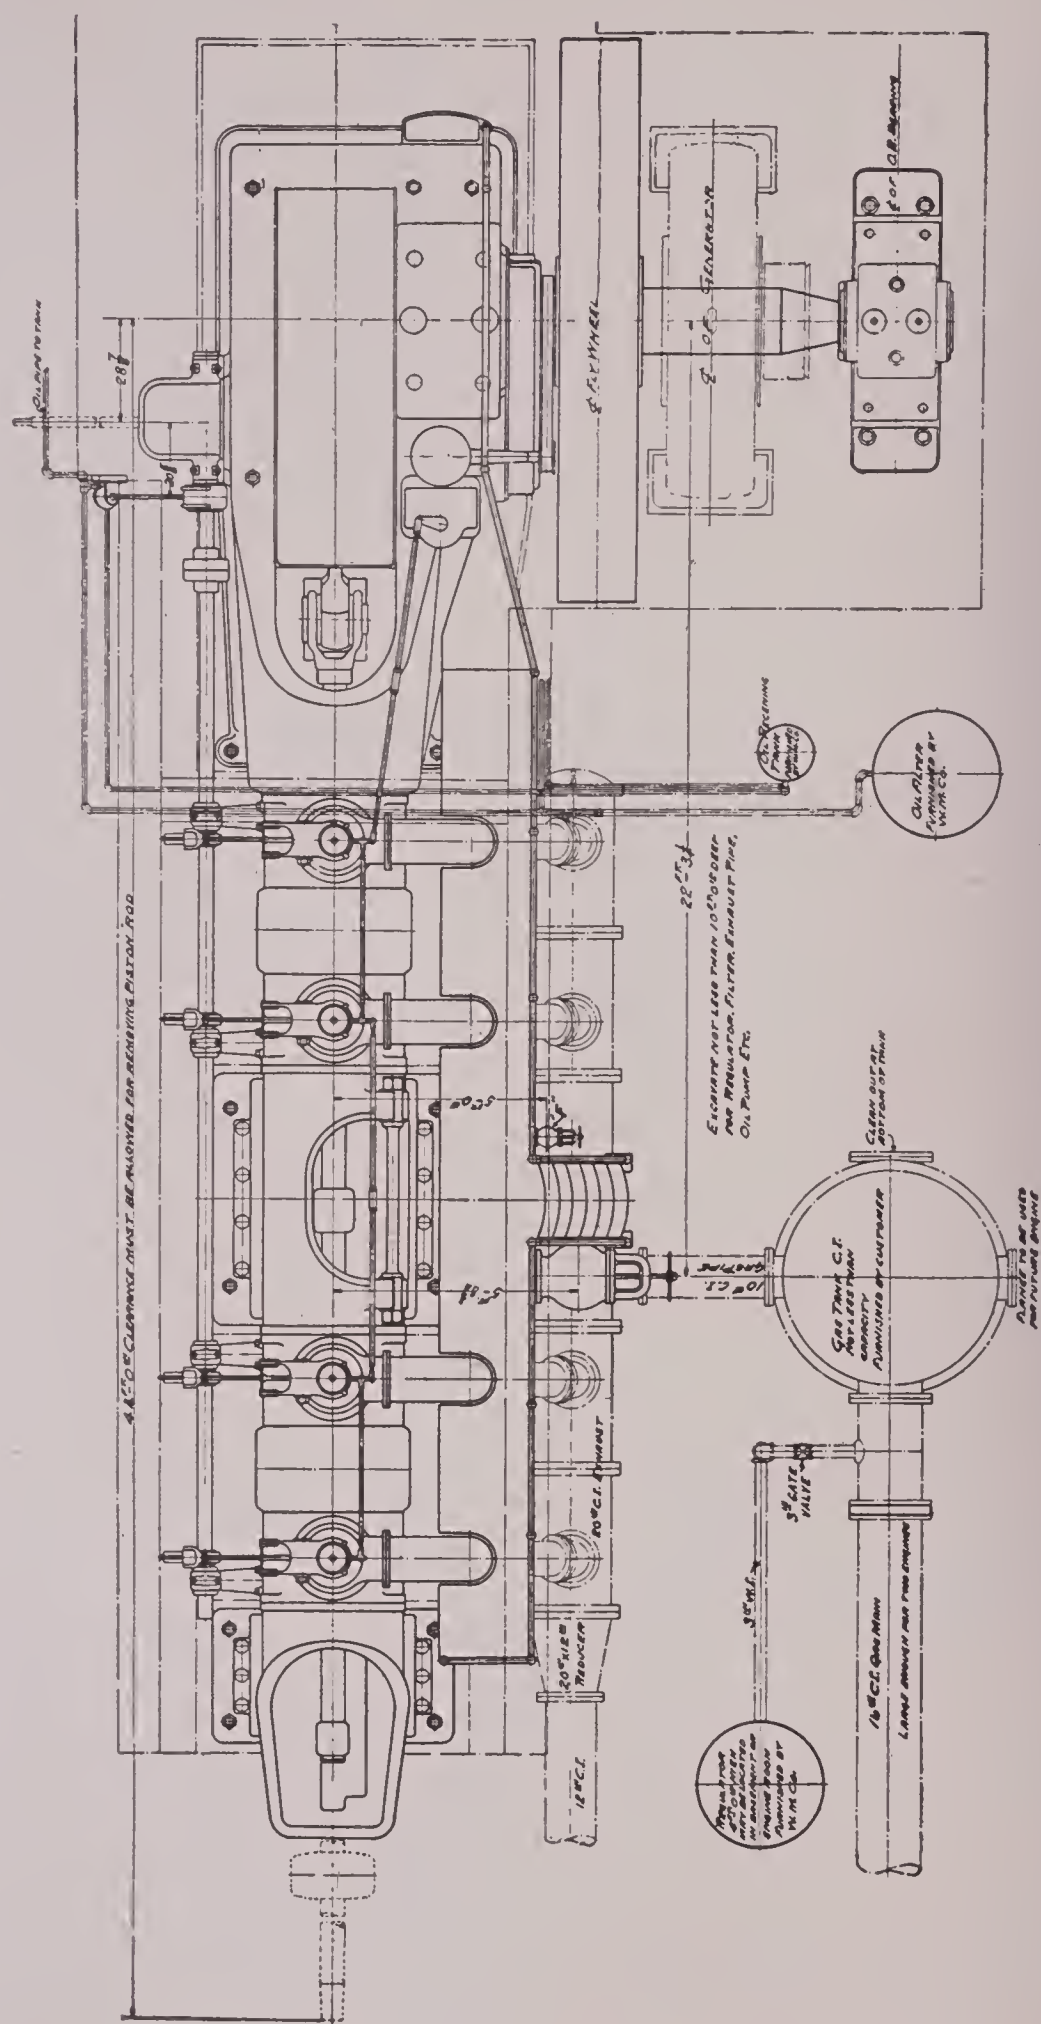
Plan View, Westinghouse Horizontal Engine.
